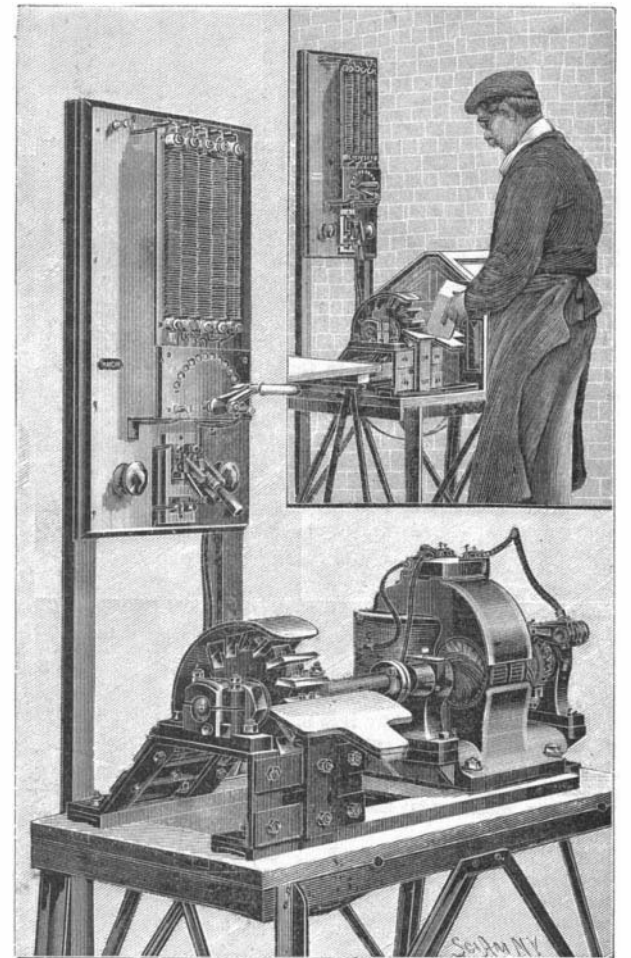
ELECTRIC TRIMMING MACHINE.
